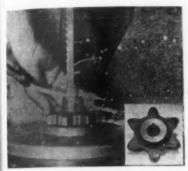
Broaching cast steel sprockets. Pieces per cutter increased from 4000 to 7000 by change to wax coolant.
